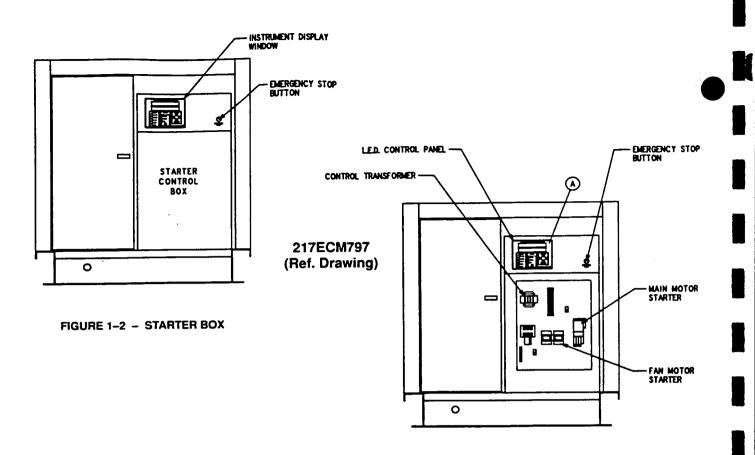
PACKAGE - CONTROLLER & STARTERS
